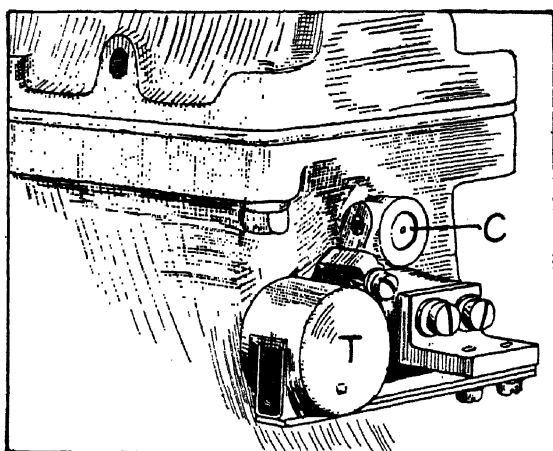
An external Thermostatic Control acting directly on Air Choke. T—Thermostat. C—Air choke butterfly valve shaft.
